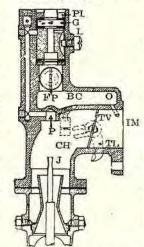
Packard fuelizer, sectional view. Names of parts: I, spray tube or nozzle; CH, mixing chamber of carburetor; TL, throttle lever; TV, throttle valve; IM, to inlet manifold; P, passage to fuelizer which leads to burning chamber of fuelizer; G inspection glass; L, retaining plug and gasket retaining inspection glass; L, retaining plug set screw; FP, fuelizer spark plug; BC, fuelizer burning chamber; O, passage of superheated exhaust from fuelizer burning chamber to intake manifold.
